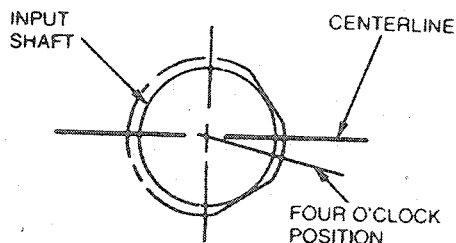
During installation, position the steering gear input shaft as shown on 1992–00 vehicles
